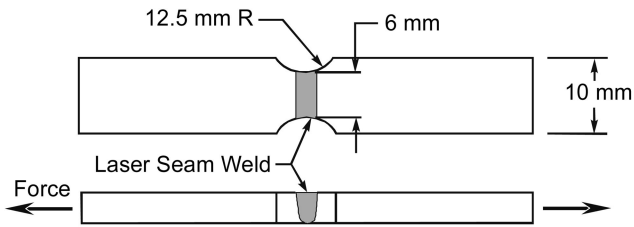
Tensile specimen geometry of the 500- $\mu\text{m}$ -thick laser seam welded Cu sheets.
